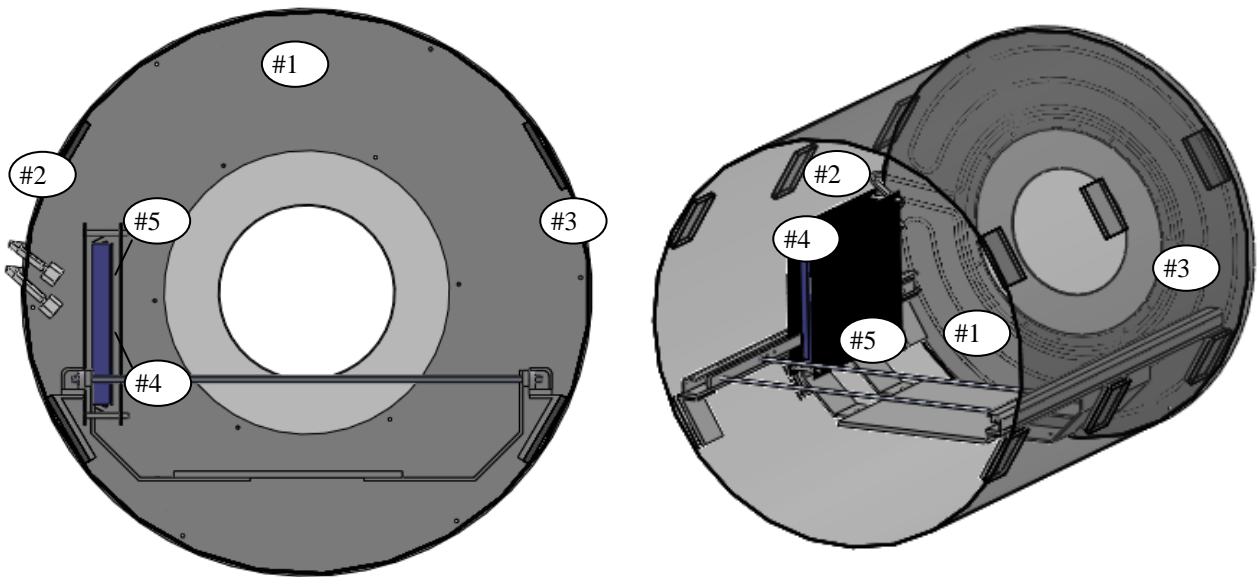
Position of the temperature sensors on the cylindrical shroud, on the frontal plate and on the hot plate
